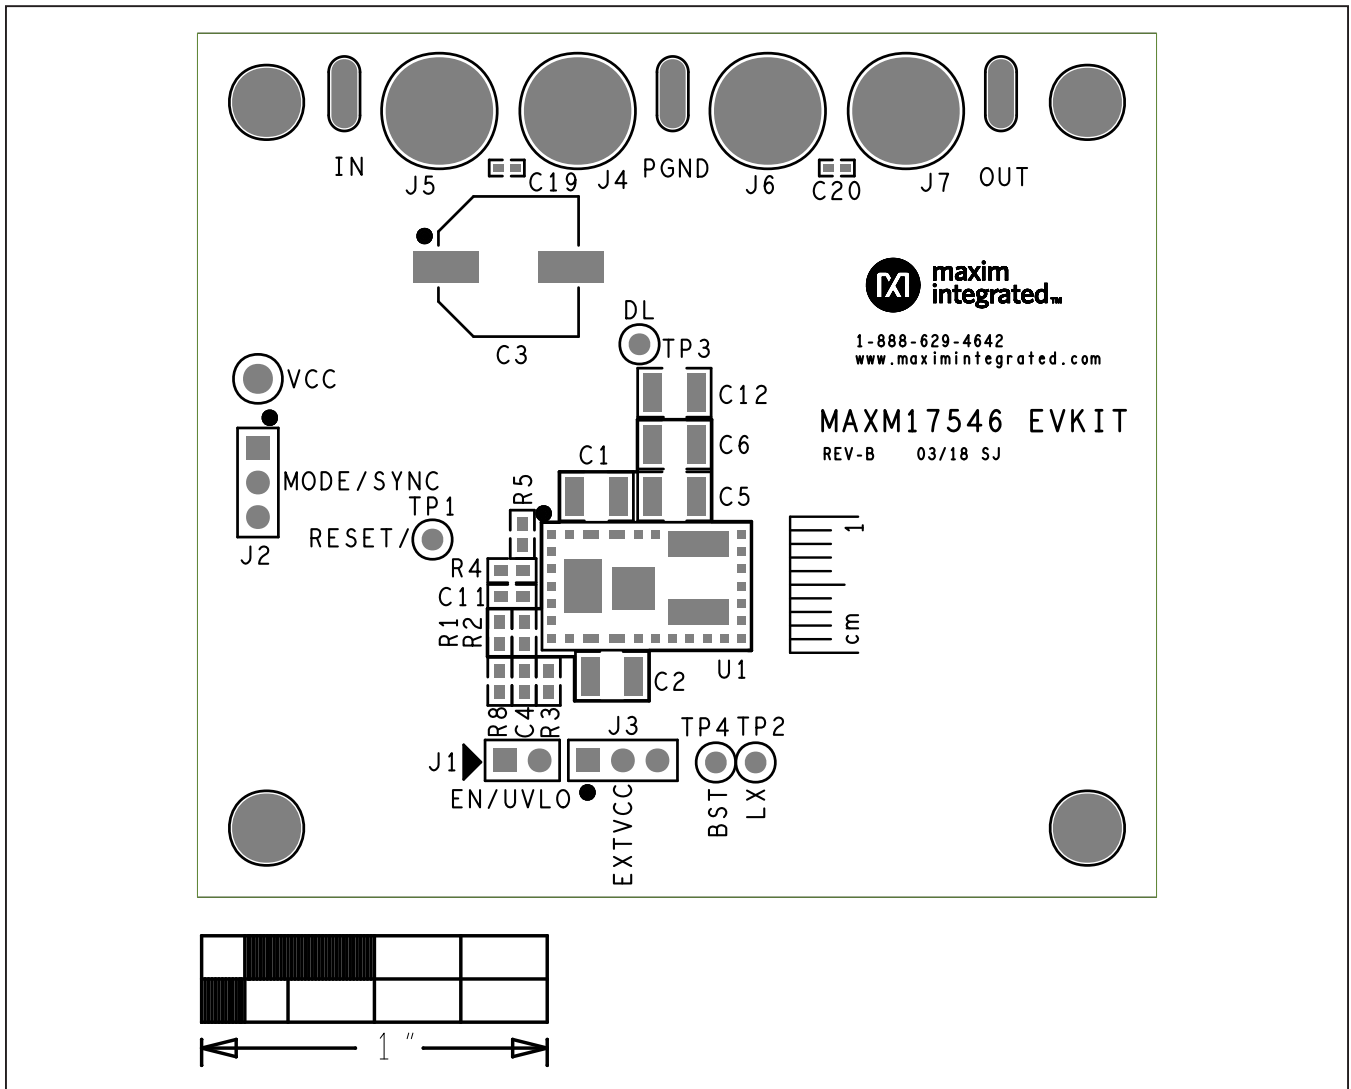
MAXM17546 5V Output EV kit PCB Layout—Top Silkscreen
